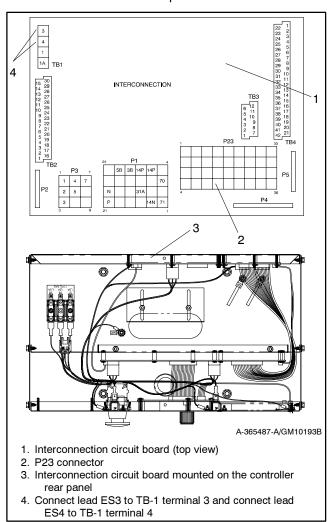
Attaching Wiring Connection Harness to Controller Circuit Board
